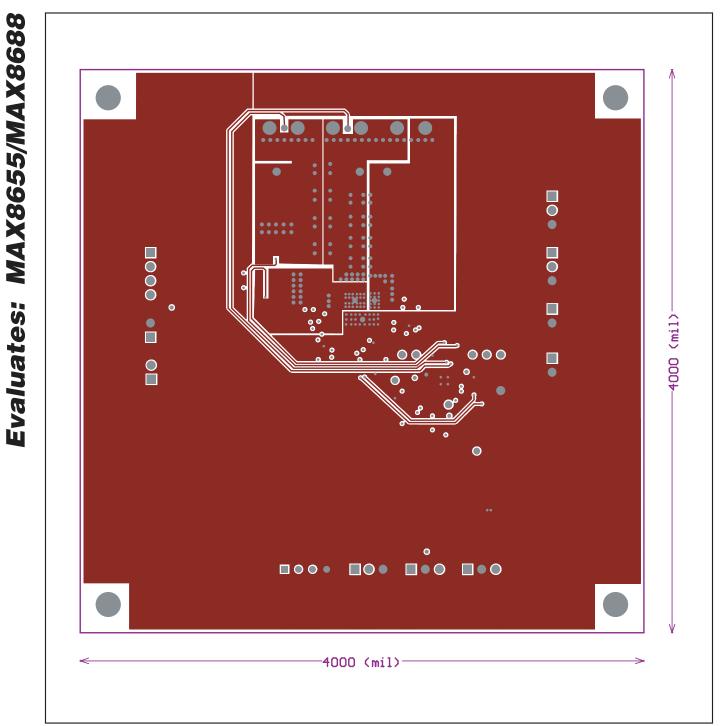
MAX8655 EV Kit PCB Layout—Inner Layer 1
